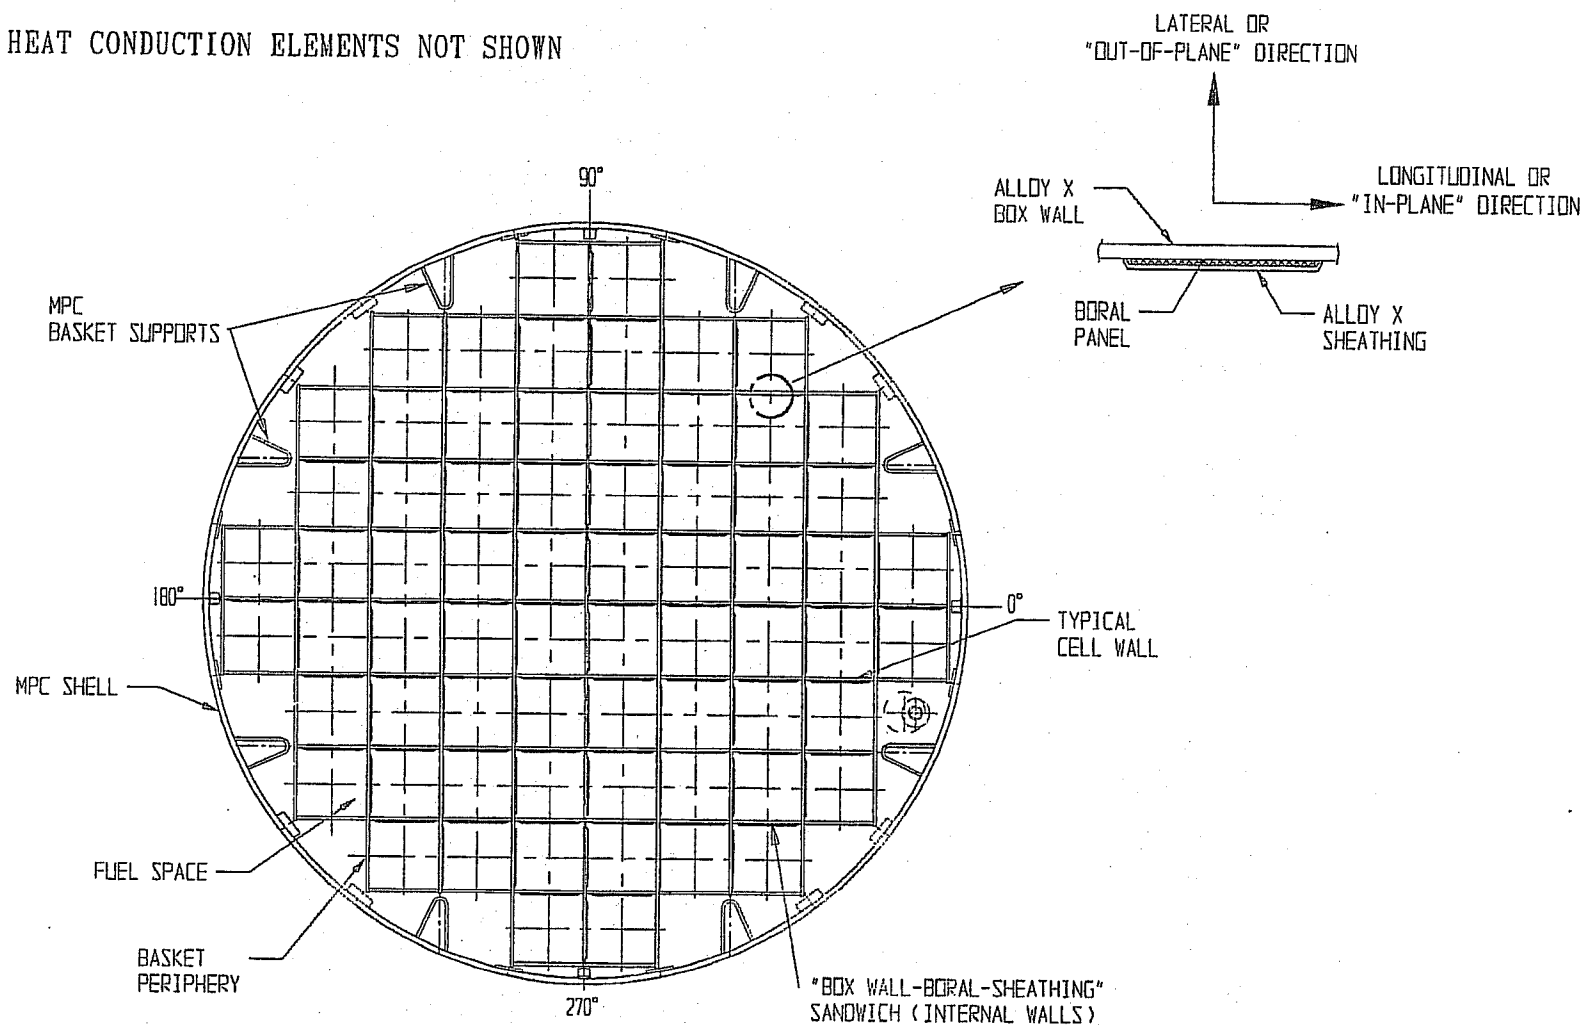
; TYPICAL MPC BASKET PARTS IN A CROSS-SECTIONAL VIEW
